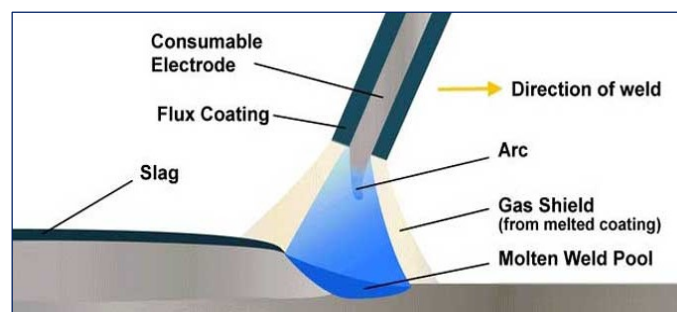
Manual Metal Arc Welding Process [14]
